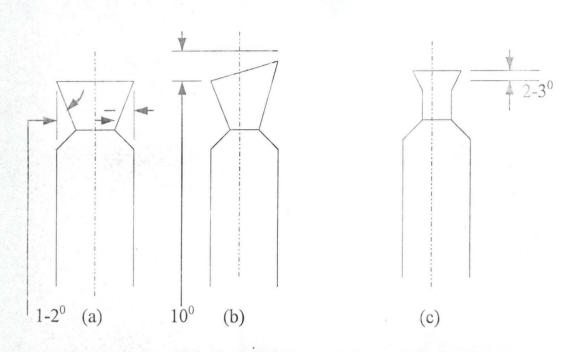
STYLES OF EDGES OF CUTTING - OFF TOOLS.
